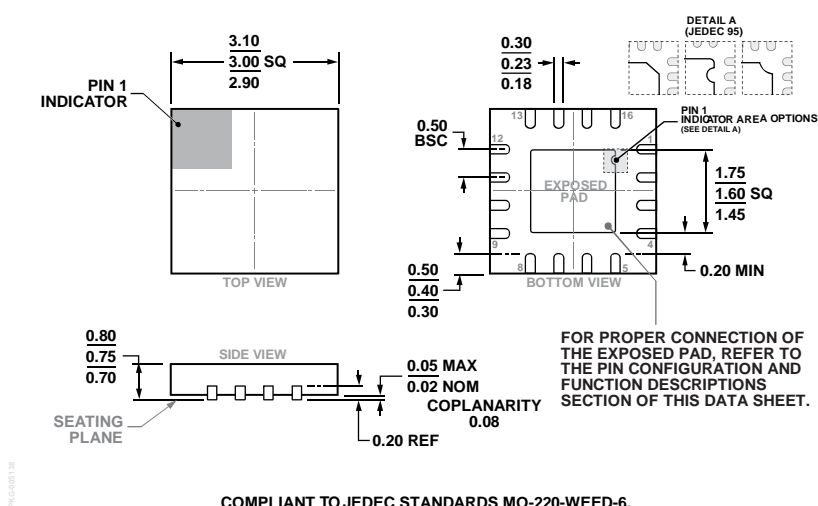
16-Lead Lead Frame Chip Scale Package [LFCSP]
